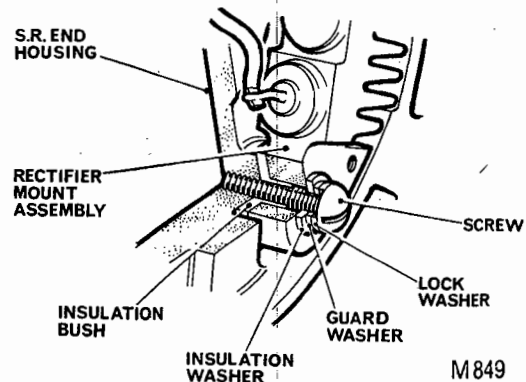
SECTION THROUGH SLIP-RING END HOUSING
